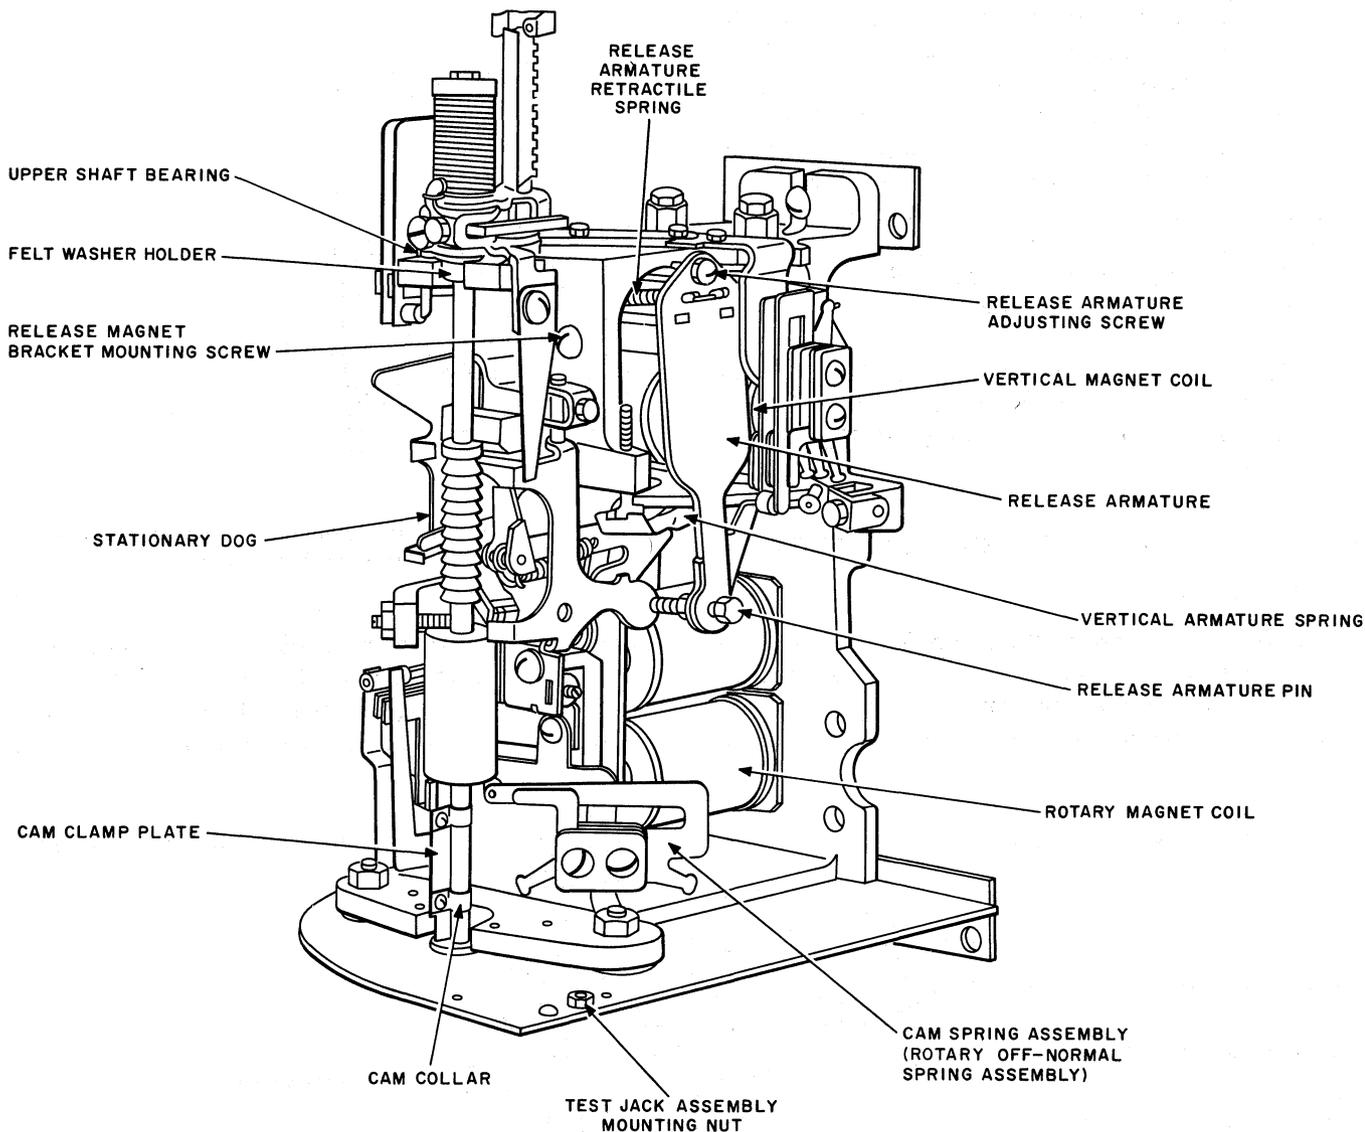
Parts of 197-Type Switch as Viewed From Right Side
